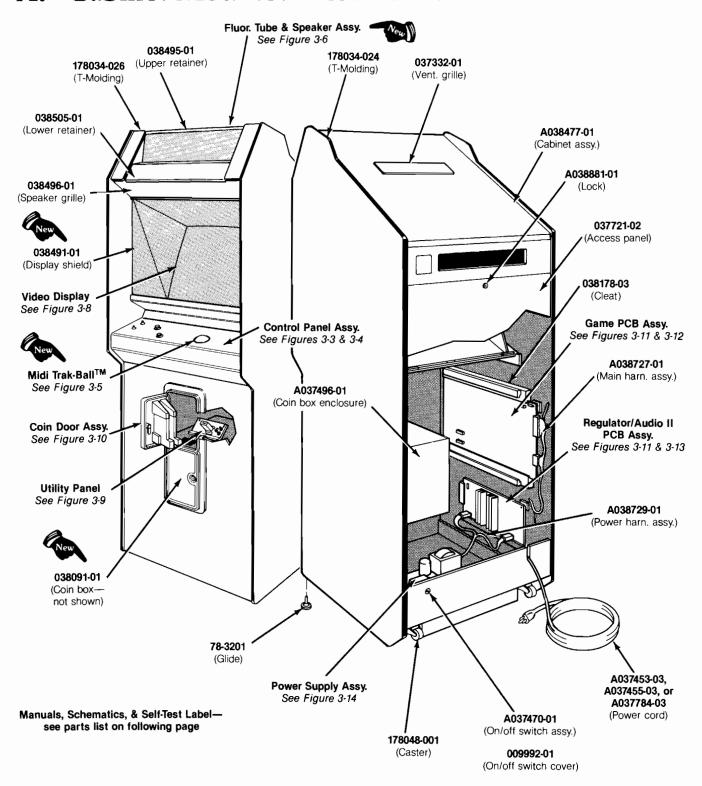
Cabinet-Mounted Assemblies Upright Cabinet A038476-01 A
